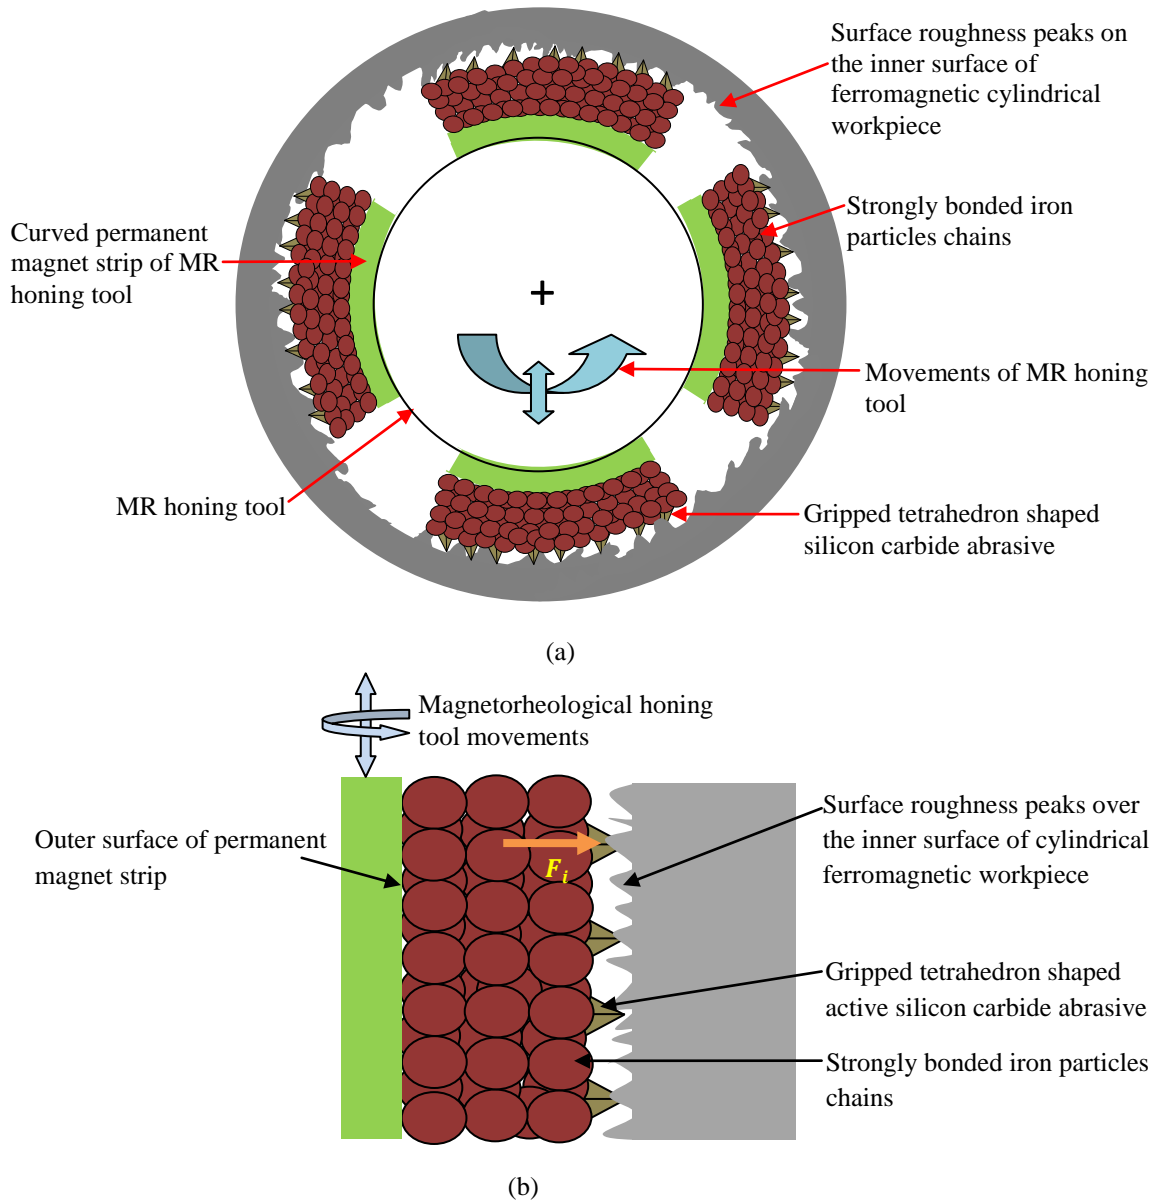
(a) Schematic diagram of the magnetorheological honing process perform finishing over the inner surface of the ferromagnetic cylindrical workpiece and (b) enlarged cross-sectional front view shows the mechanism of surface finishing by the present developed process.
